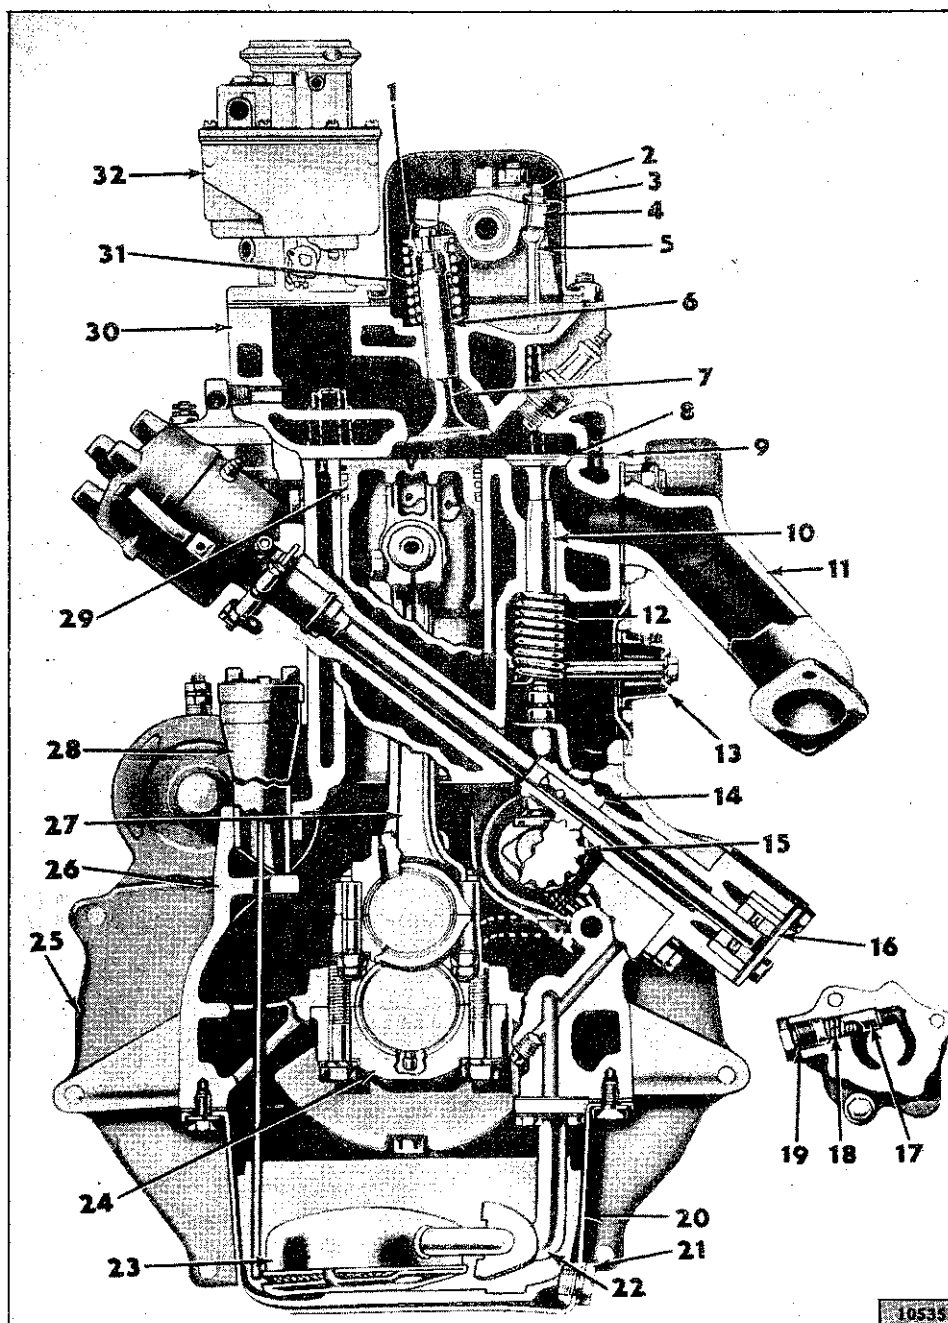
END SECTION VIEW OF F4-134 ENGINE
